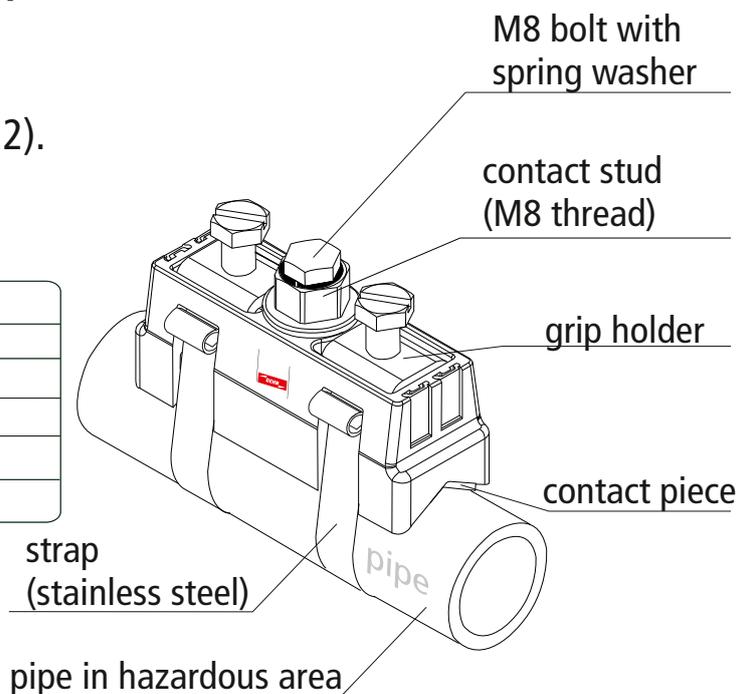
Ex-BRS 27 pipe clamp installed at a pipe (hazardous area)
